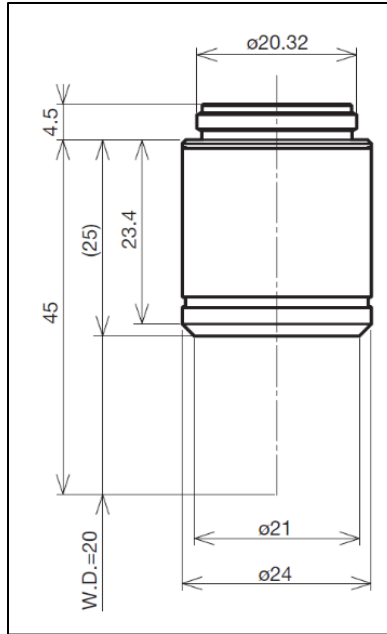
Mechanical Drawing of the MPLN5X Objective [27].
